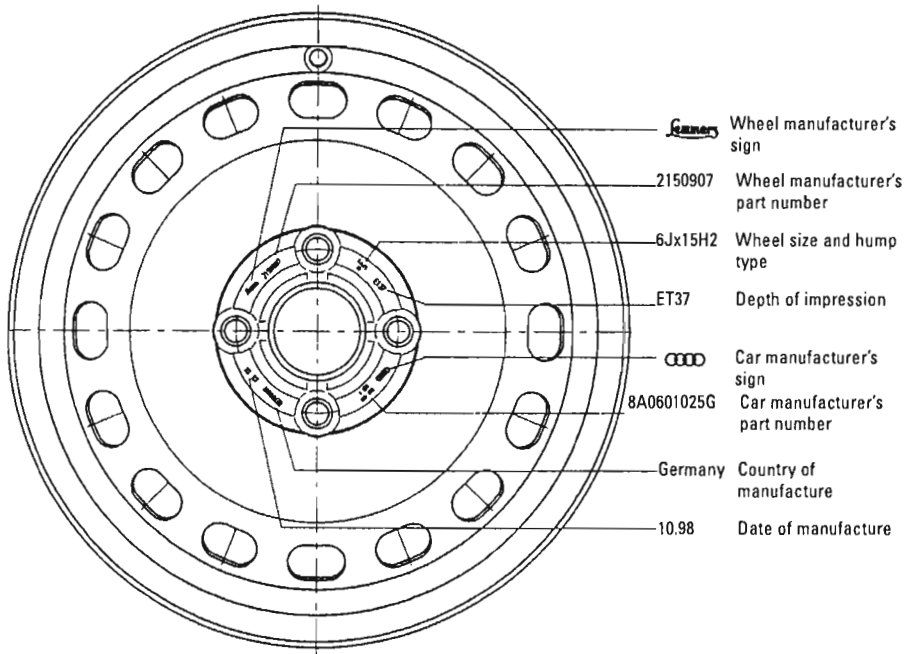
Double-hump sheet metal disc-type wheel with openings for cooling the brakes. Also pictured is the stamp in accordance with the German standard DIN 7829, indicating manufacturer code, rim type and date of manufacture (week or month and year).
